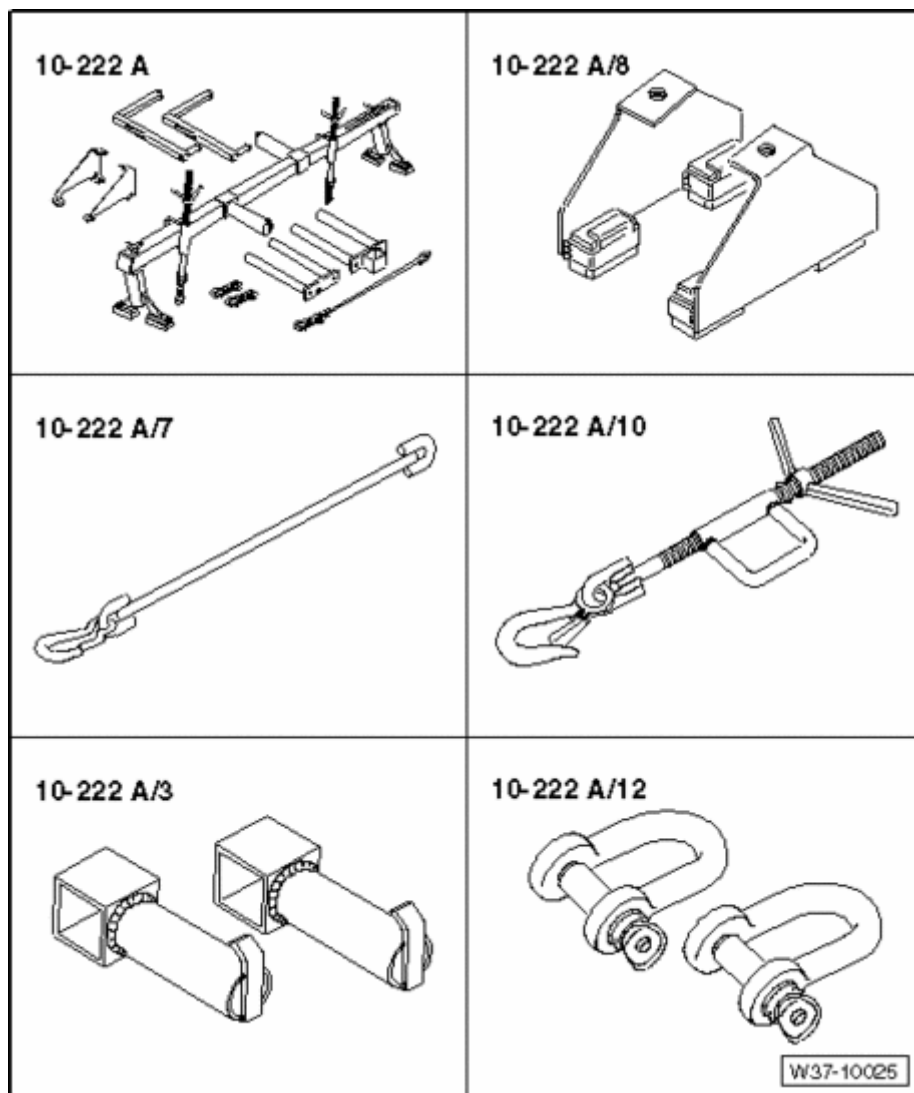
Identifying Special Tools -- Transmission, Removing (2 Of 2)
